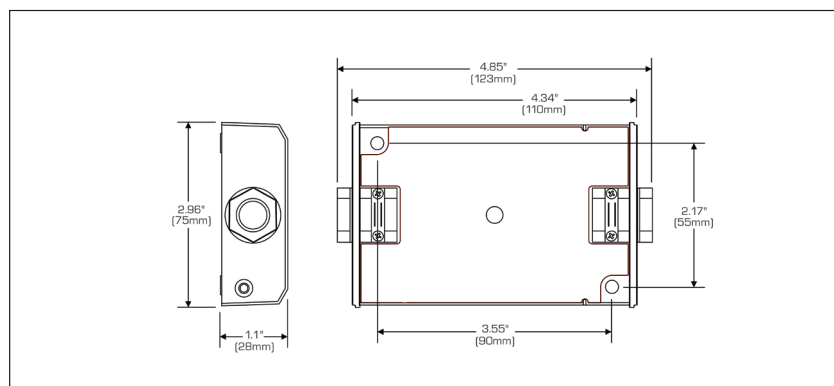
Dimensions and mounting — MA05/I and MA10/I
